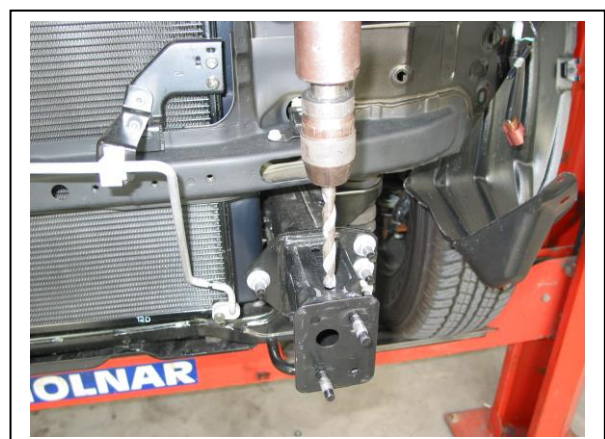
Drivers side shown. Removing bumper cover clip assembly.
